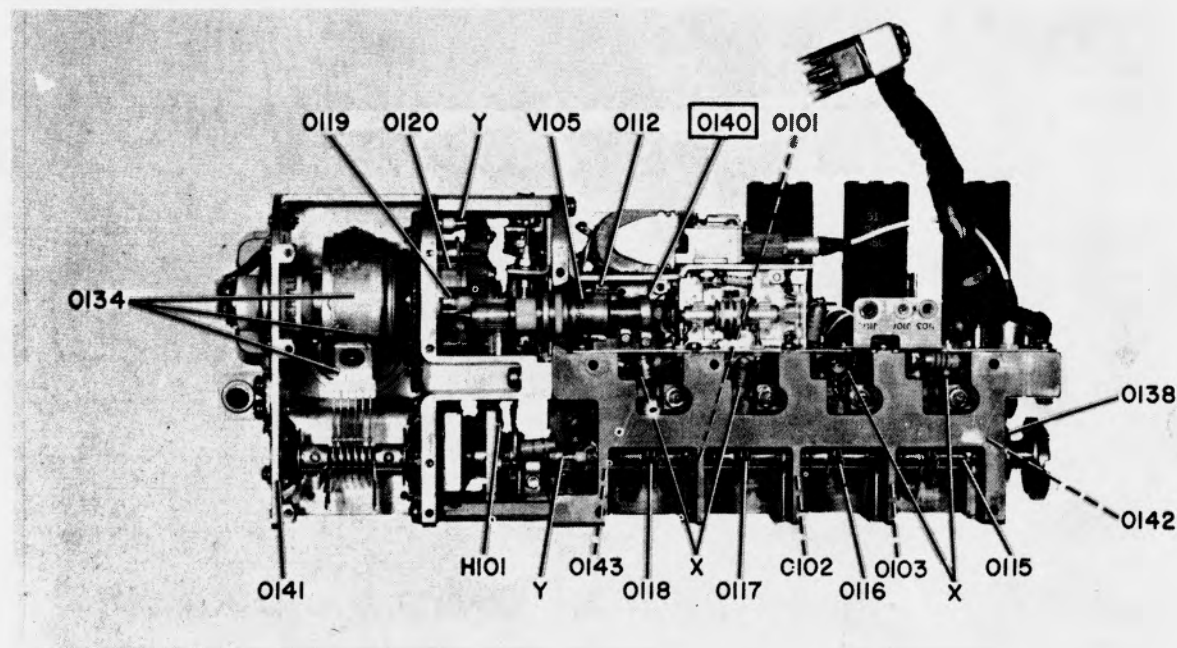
RT-581( )/URC-9, RF and PA Amplifier Assembly, Left Side, Disassembly Points
